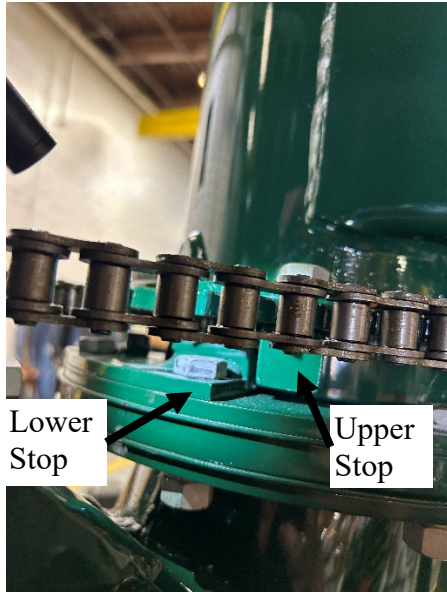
Hydraulic Swing Adjustment (Shields Removed for Clarity).
